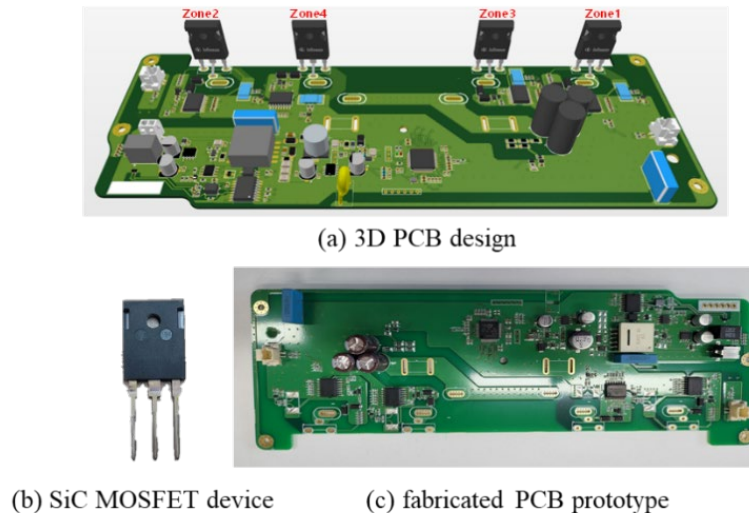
Overview of the proposed four-channel PTC controller showing the 3D PCB layout, SiC MOSFET device, and the fabricated PCB prototype.
